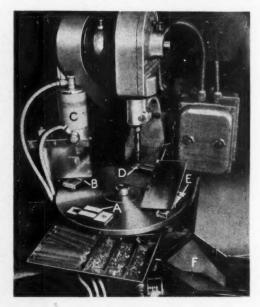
The Townsend Riveting Machine Equipped with an Air-operated Indexing Table
